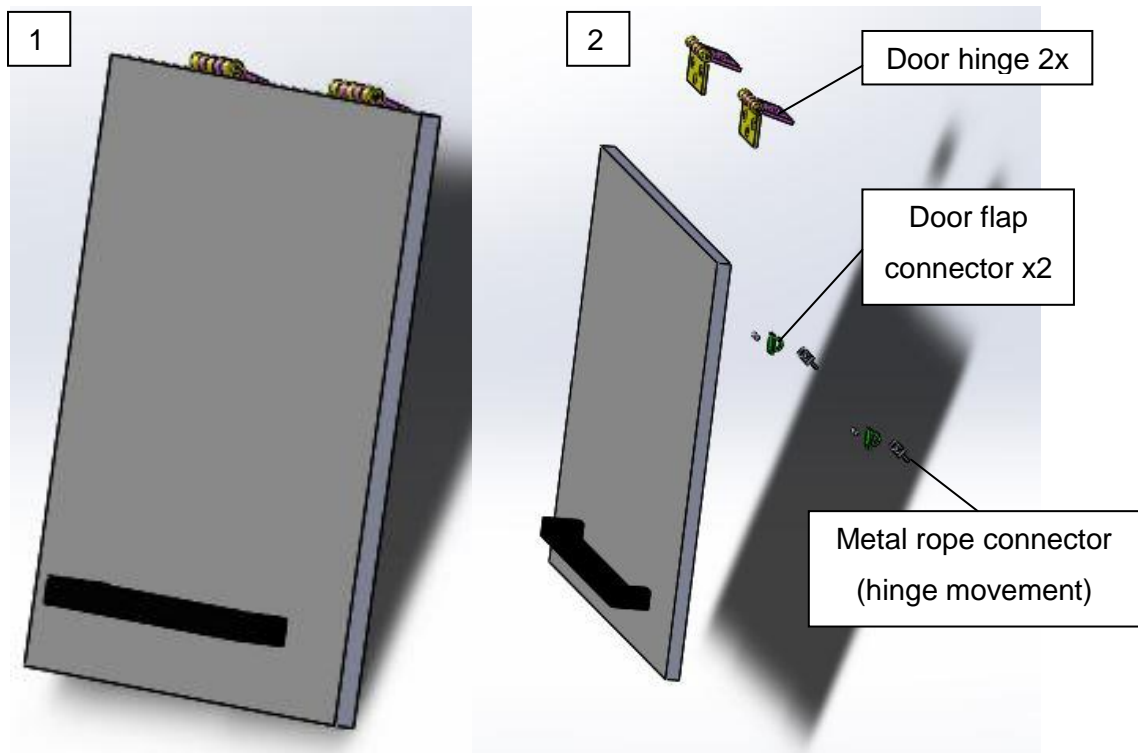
Door sub - assembly (1 - normal view, 2 - exploded view).
